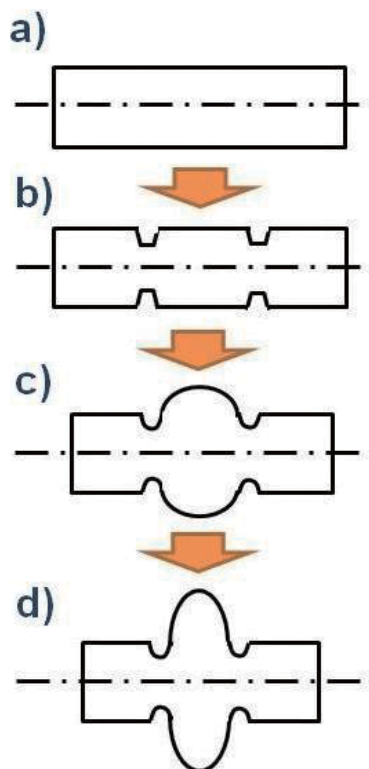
Schematic diagram of manufacturing process of seamless cavity. a) seamless elementary tube, b) after necking, c) after 50% hydroforming, d) after 100% hydroforming.
